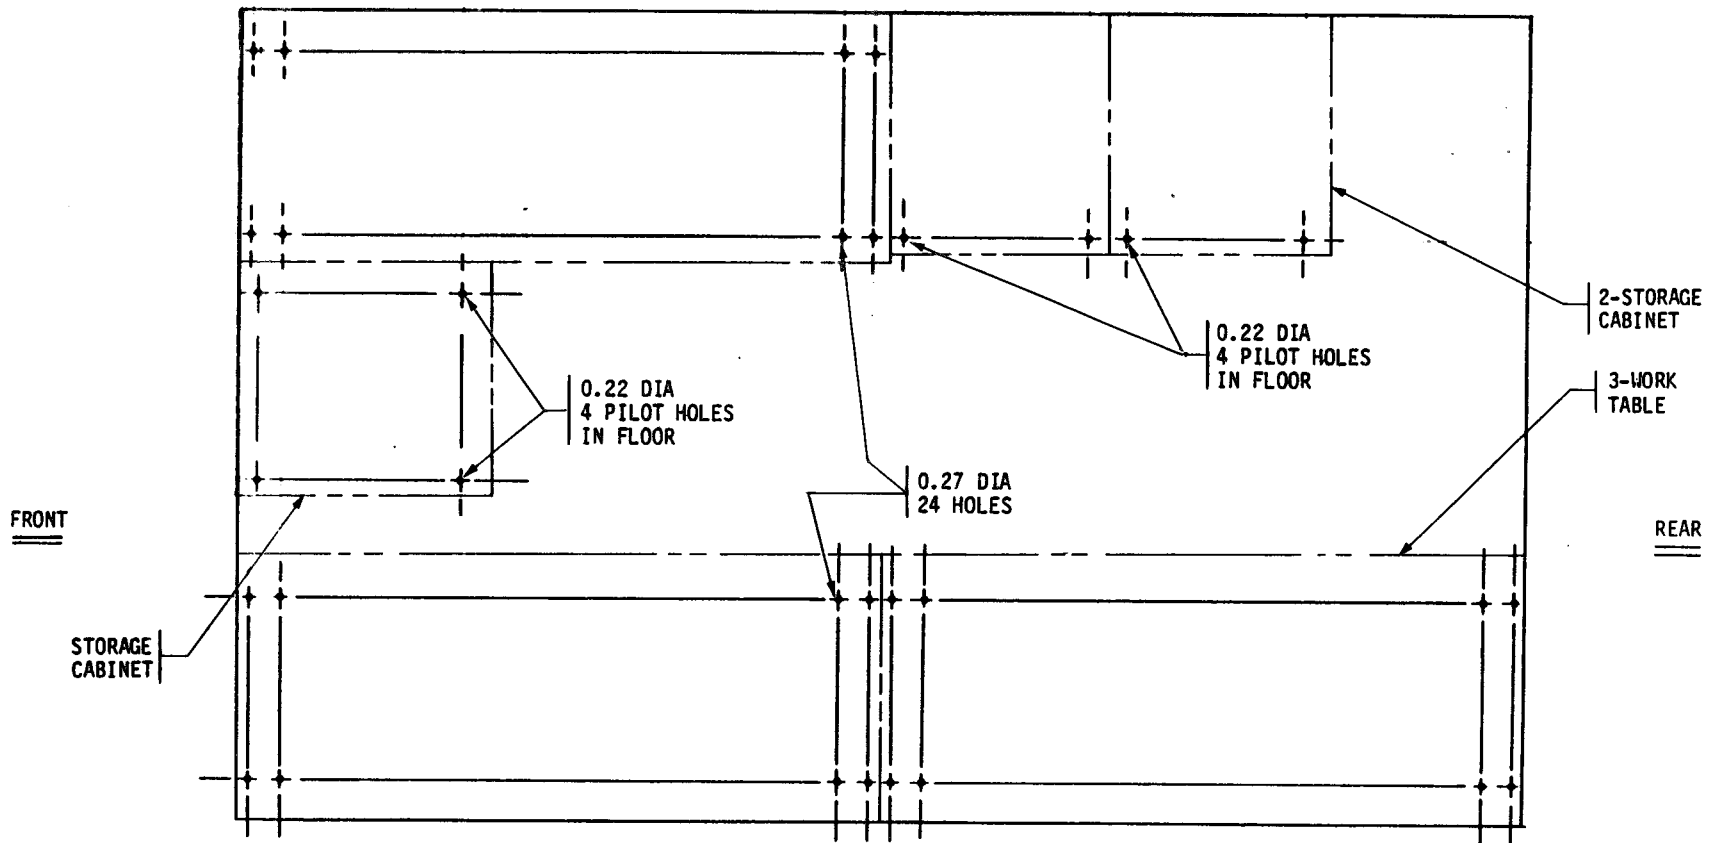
Hole dimensions for mounting components, floor plan, unit 1, M109A3.
